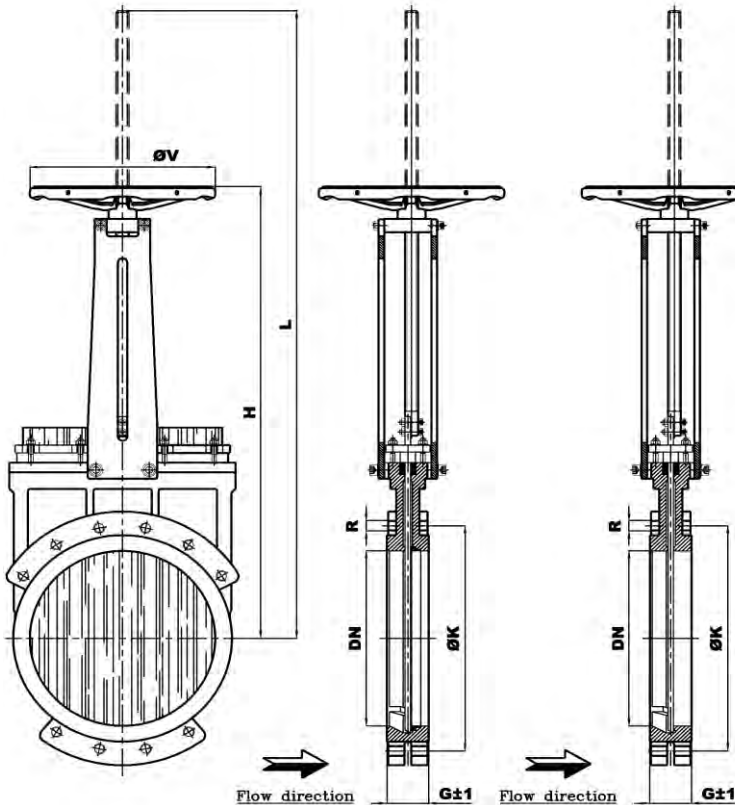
KGV MU series semi lugged rising stem with handwheel & gearbox
